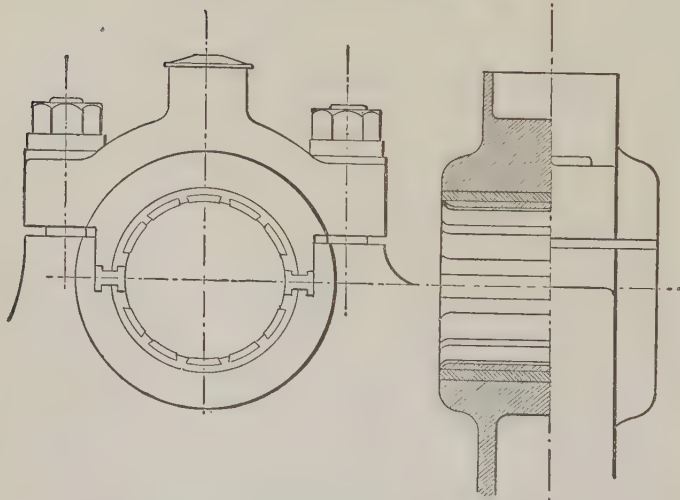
Improved Form of Crank-Shaft Bearing.
